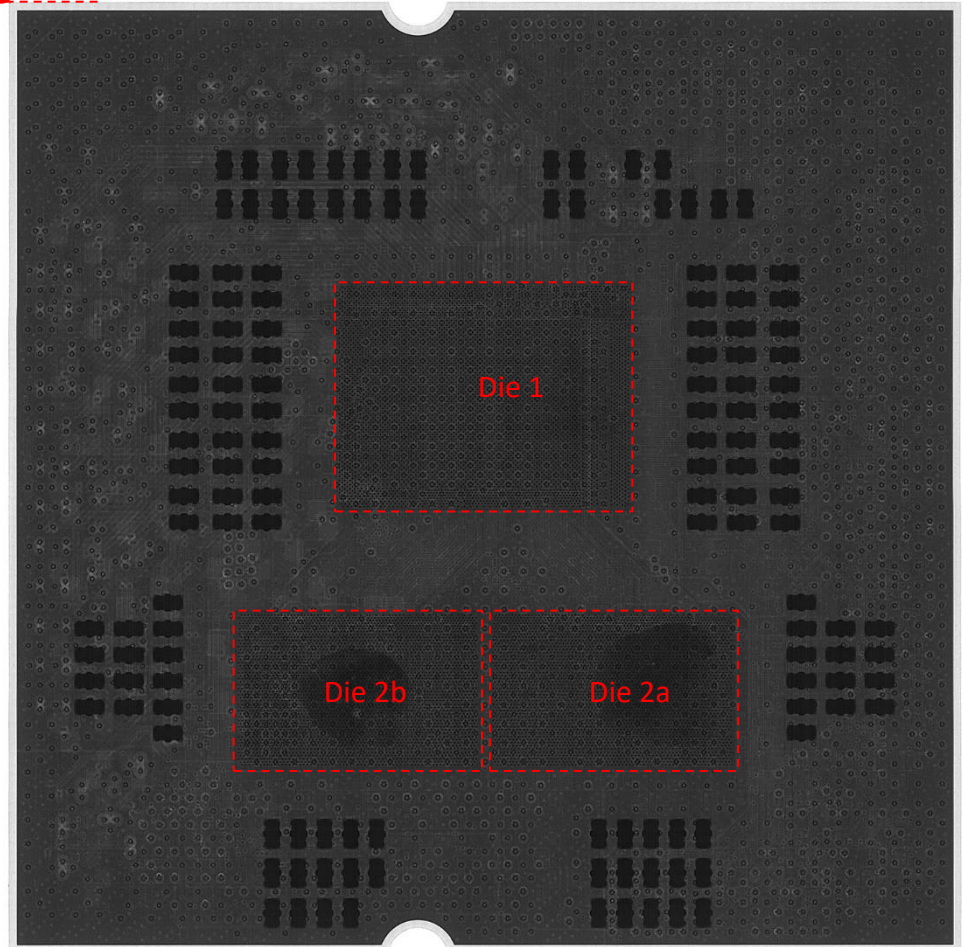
X-ray (Package after heat sink removal後)
